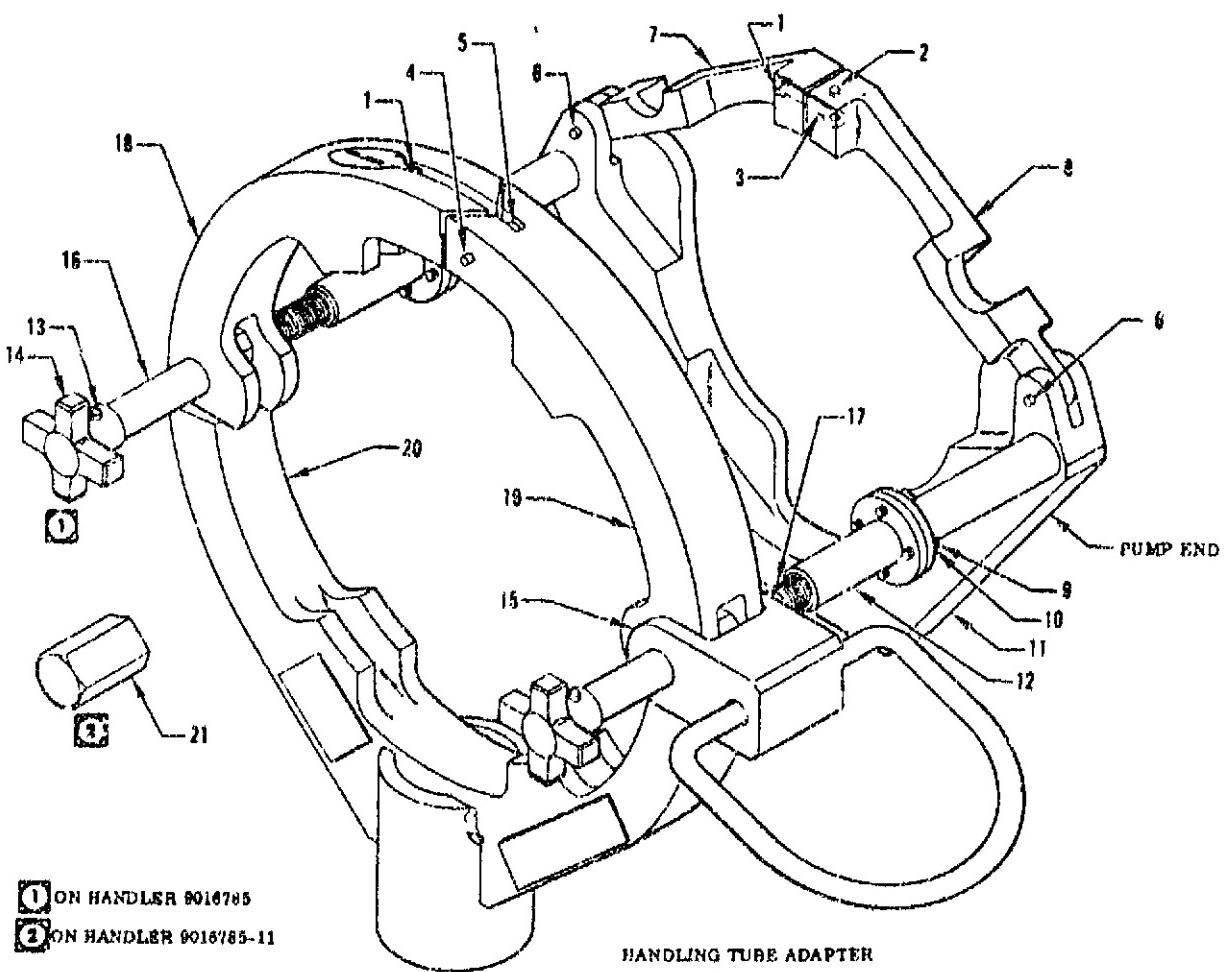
Fuel Inlet Duct Handler (Sheet 1 of 2)
